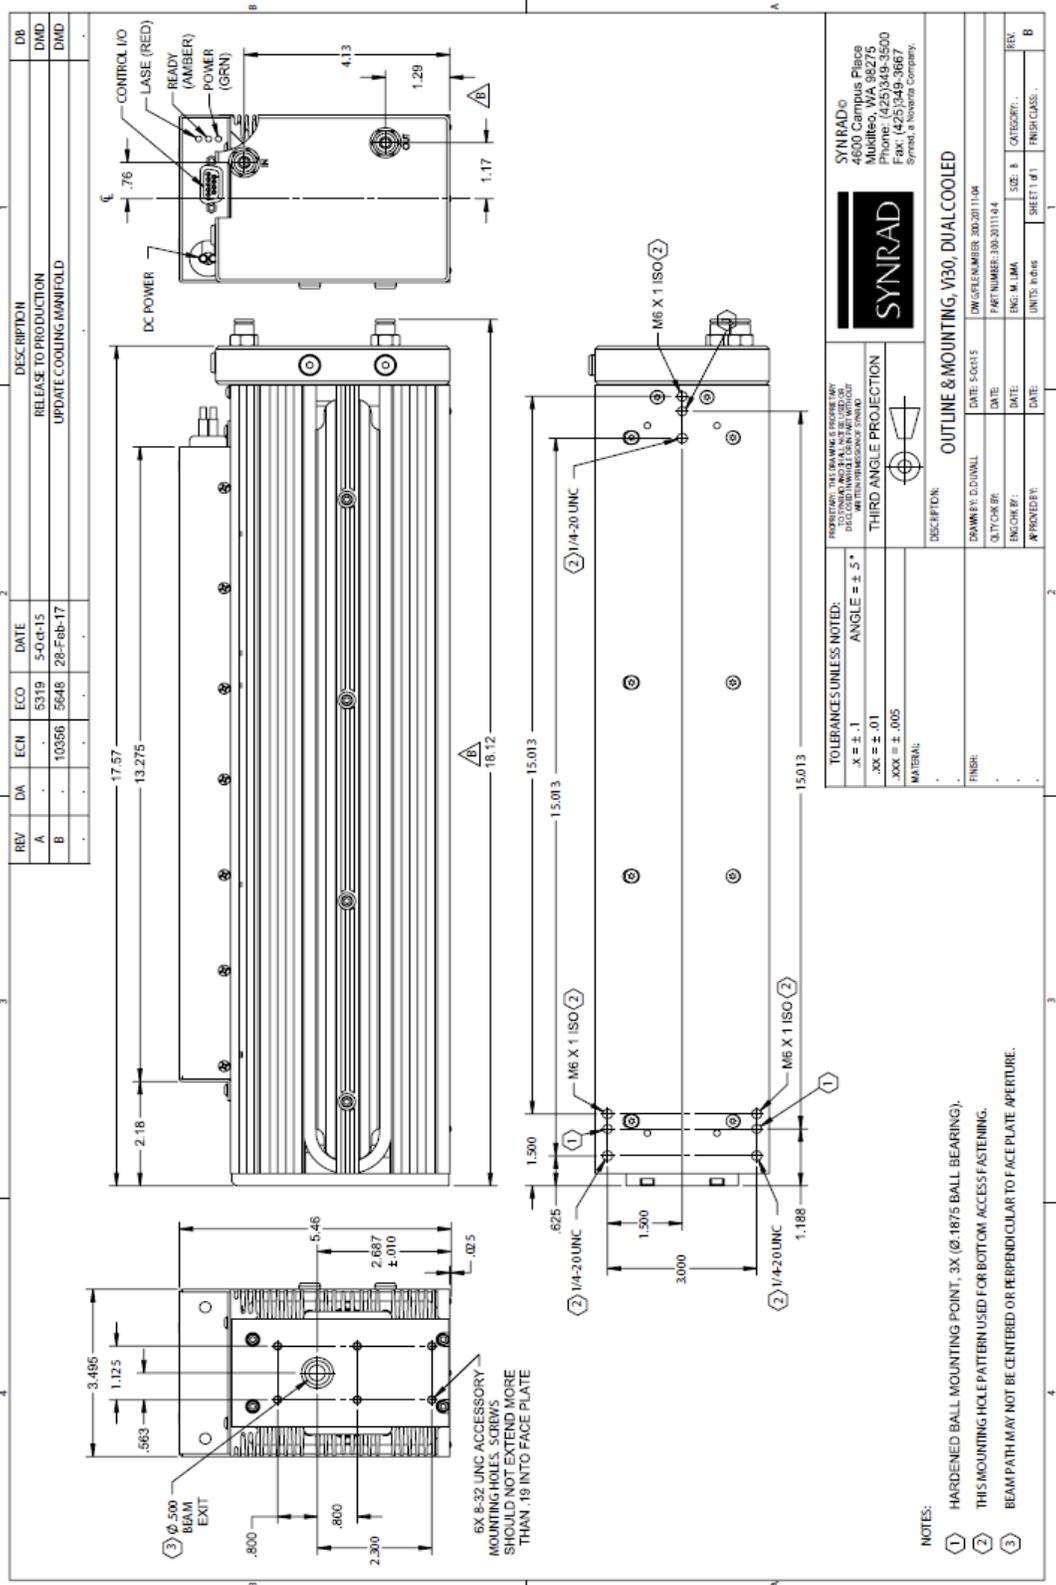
OEM vi30 Dual-cooled outline and mounting diagram
